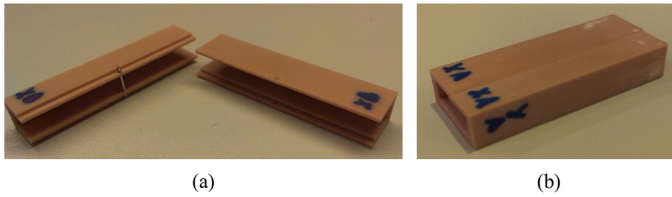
Manufactured test structure, with outer dimensions of the assembly of 5 mm × 12 mm × 30 mm and a thickness of 1 mm. (a) Separate parts. (b) Assembled parts.
